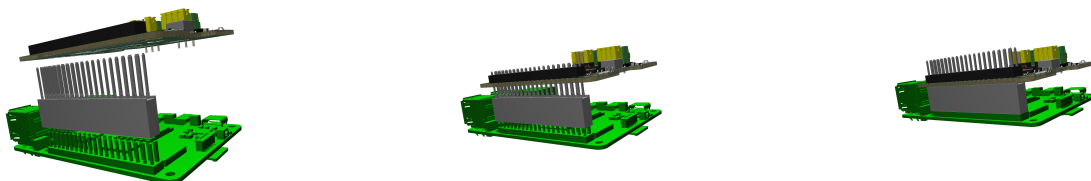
Assembly of the 2x20-pin stackable header between Raspberry Pi and HAT
